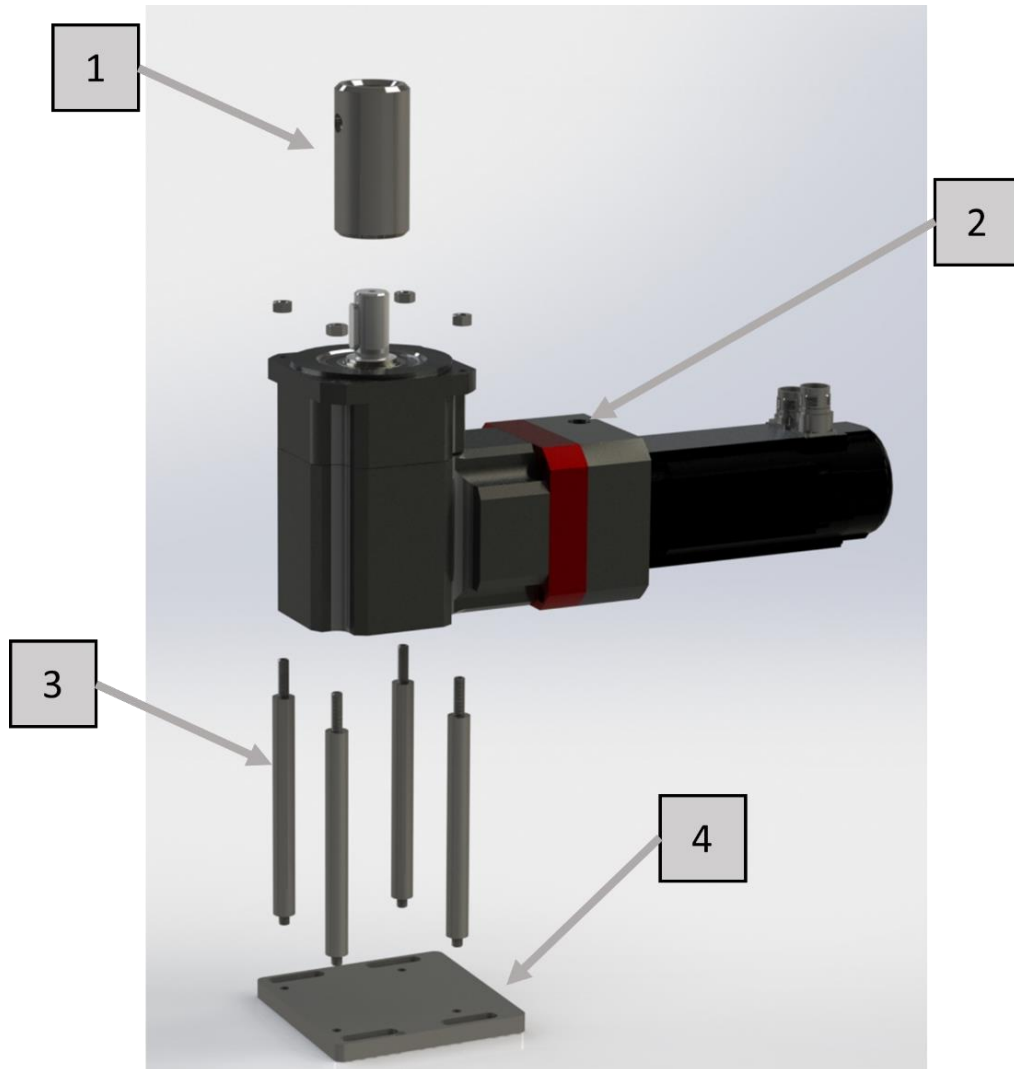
Torsional actuator and associated mounting fixtures. 1) BMEL female mount, 2) Torsional actuator and associated servo motor, 3) Load bearing rods for mounting, 4) Adaption plate to Thorlabs breadboard
